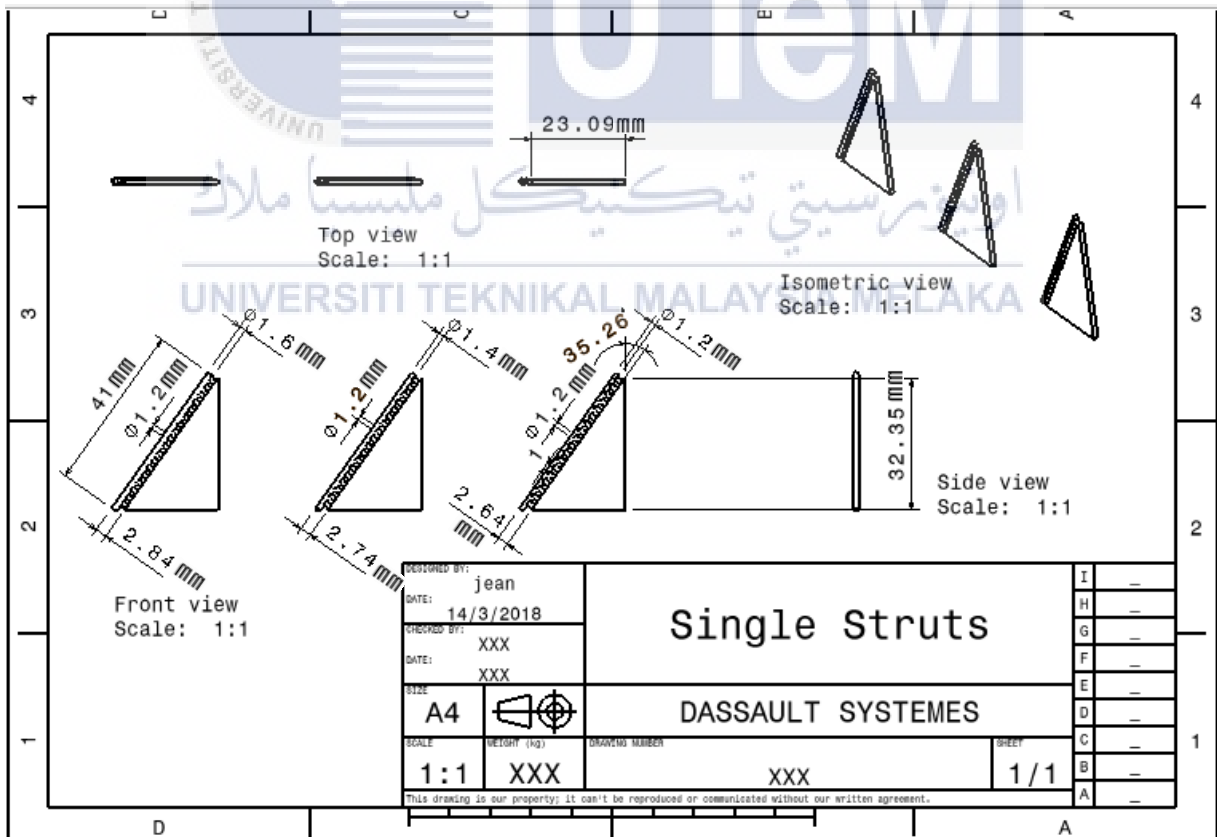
The dimension drawing of single struts with 35.26° using CATIA.
